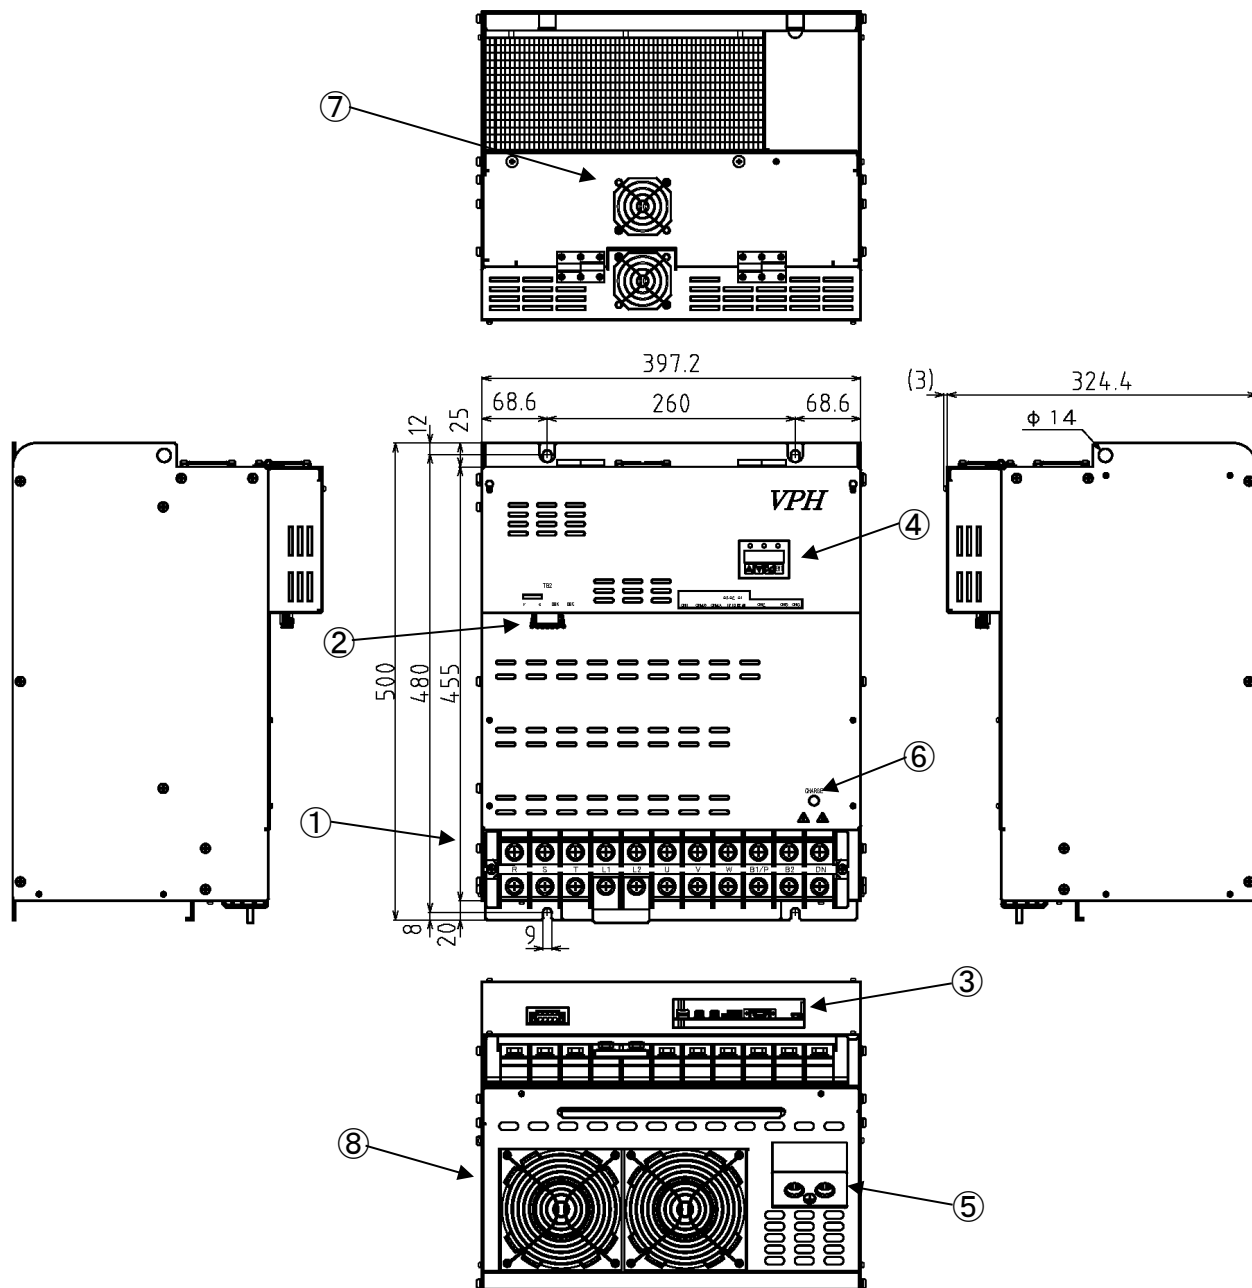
Outline drawing of the main unit of the device with 37 kW (Type 1)
